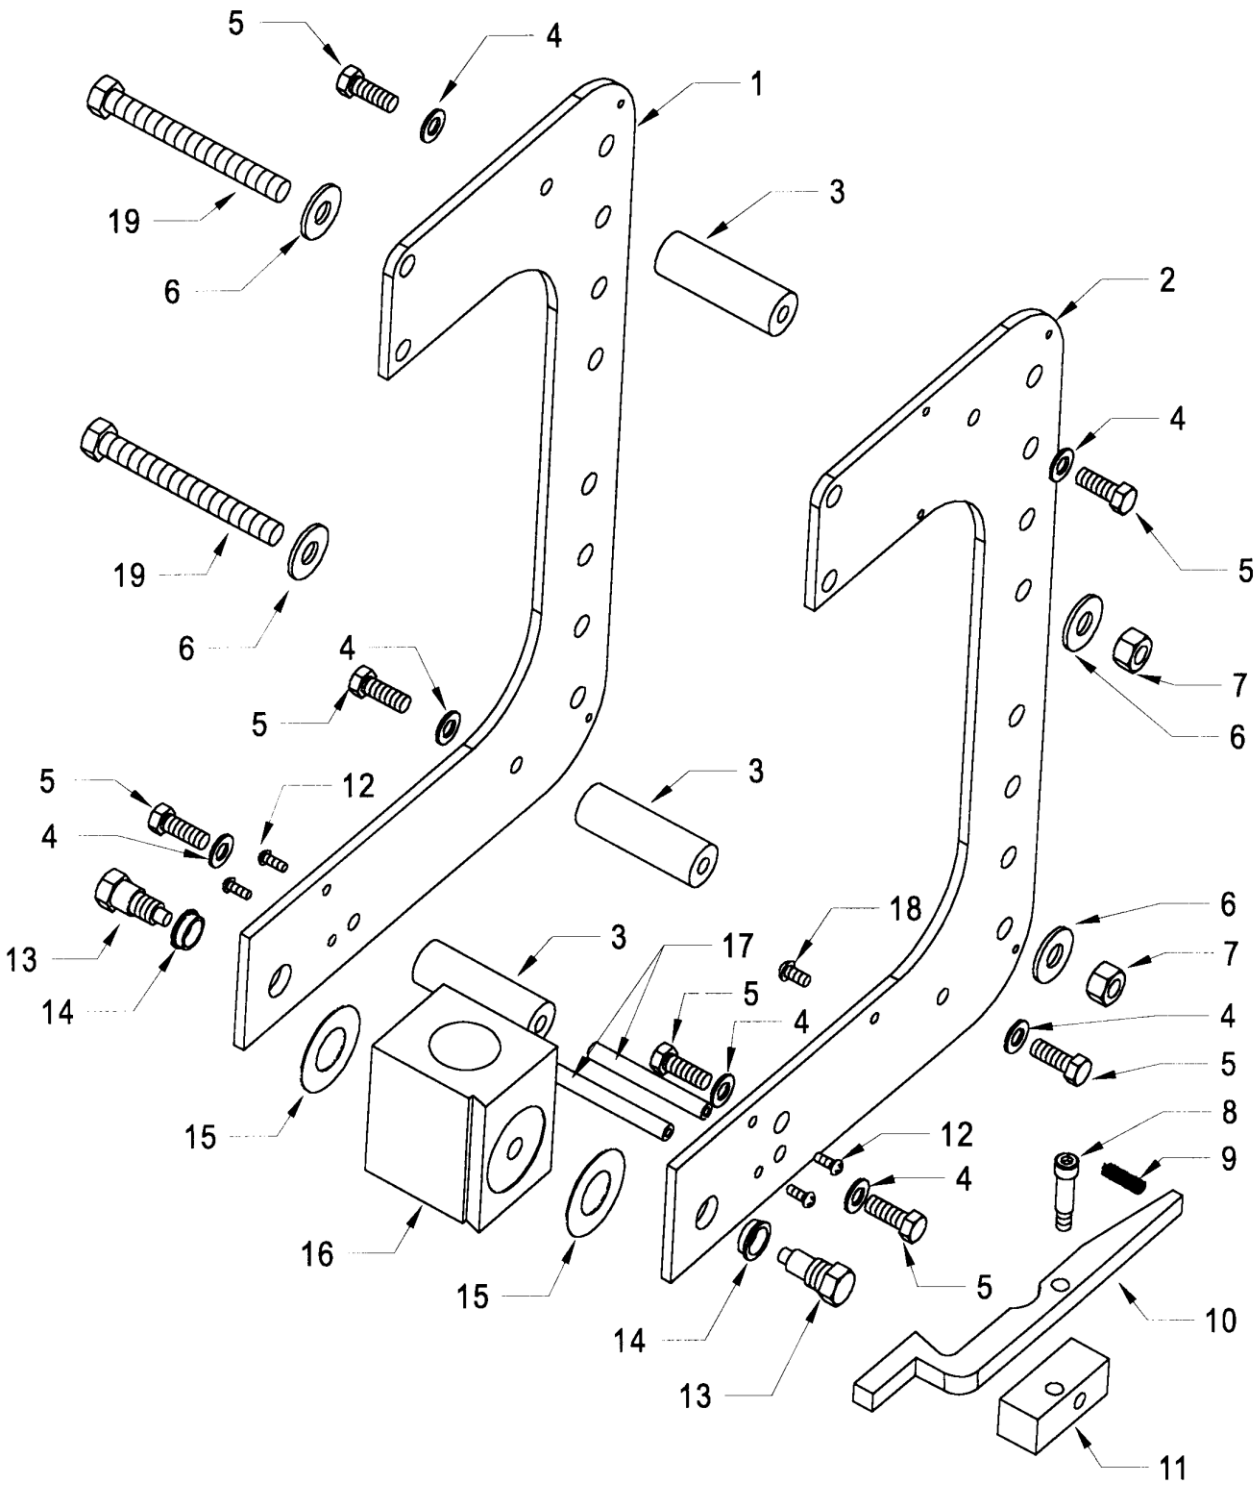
MANDREL ASSEMBLY BREAKDOWN
